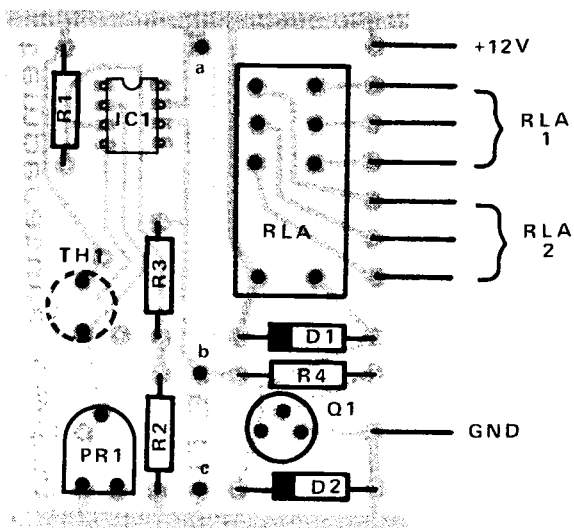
Component overlay. Note the provision of extra pads on the PCB so that TH1 and TV1 may be transposed, if required. TH1 may be mounted remotely.
